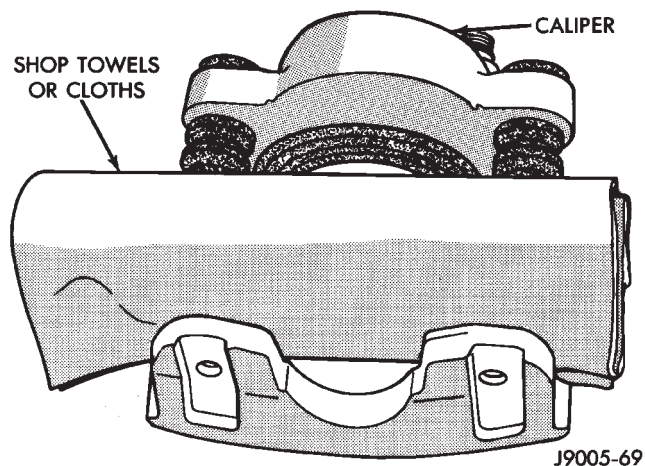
Padding Caliper Interior To Protect Piston During Removal
